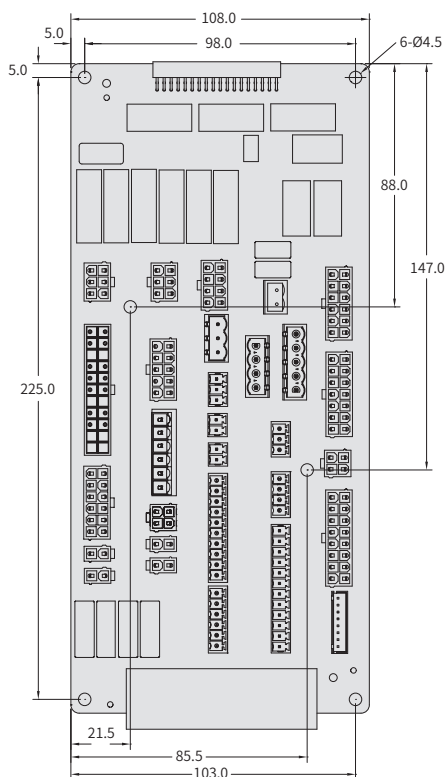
Outline and dimensions of the MCTC-KCB-N1 (unit: mm)
